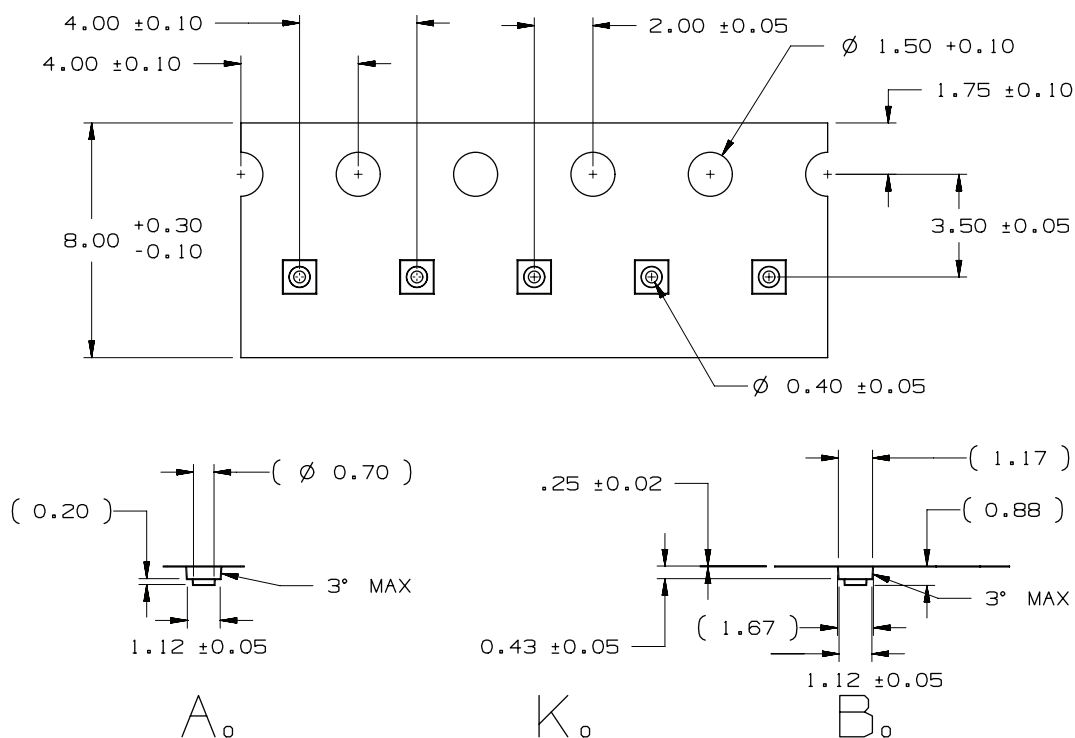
Pocket tape dimensions for LUXEON UV FC1.
